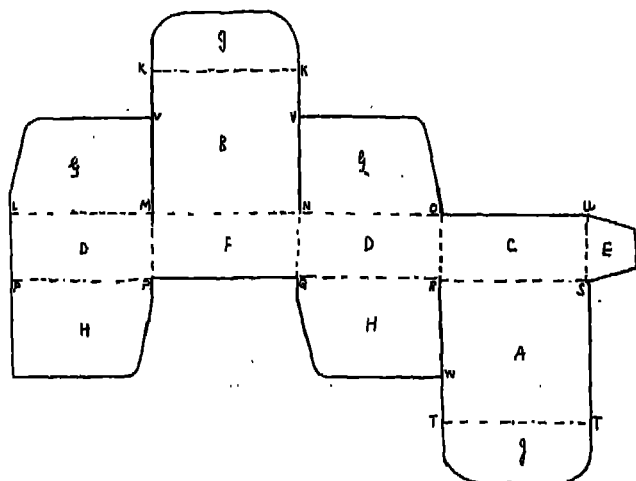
SINGLE-PIECE ROUGE PACKET.
